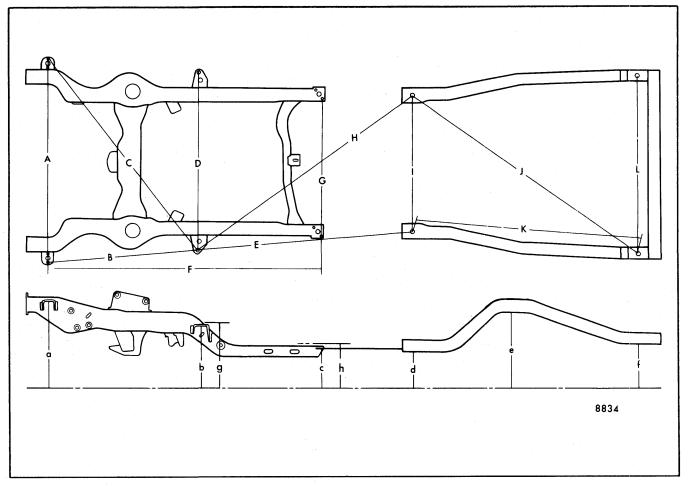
Horizontal and Vertical Checking Dimensions
